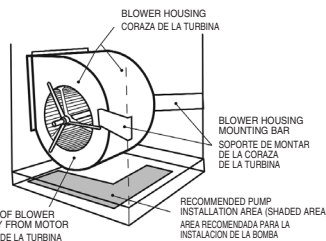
SIDEDRAFT COOLER (PARTIAL ILLUSTRATION)
